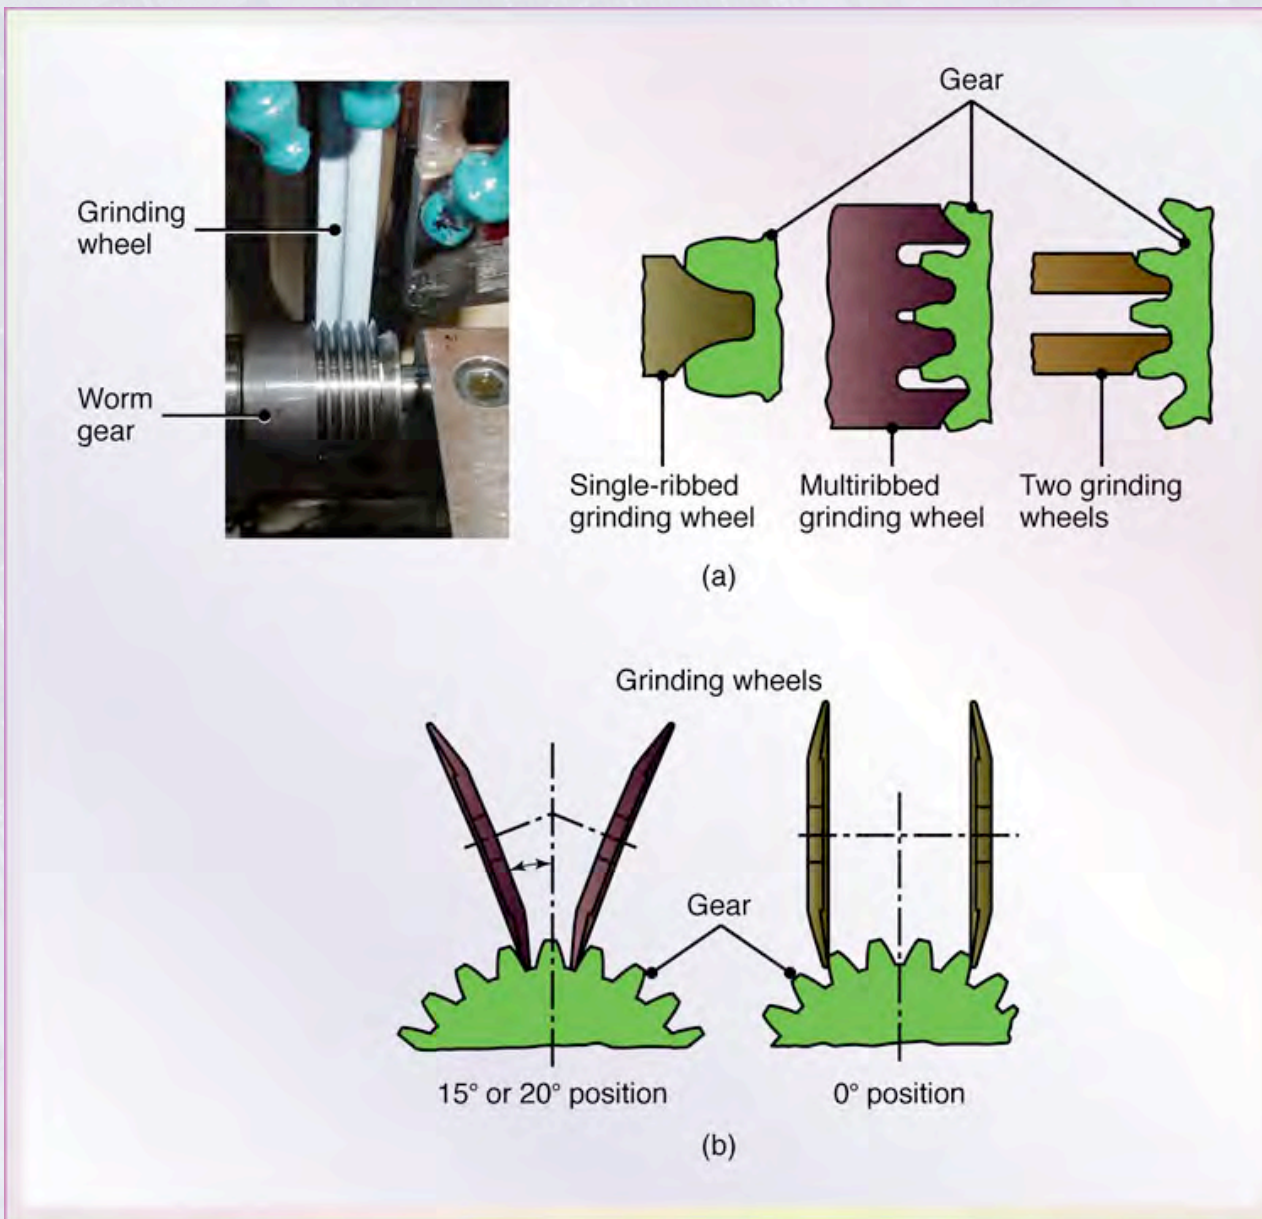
Finishing gears by grinding: (a) form grinding with shaped grinding wheels; (b) grinding by generating with two wheels.
